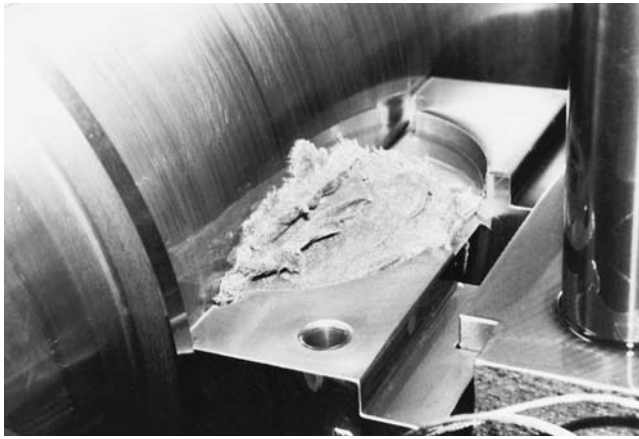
Rags Found in the Oil Galley of a Journal Bearing on a High-Speed Gearbox of a 20 MW Gas Turbine Generator Train after an Extended Run.
